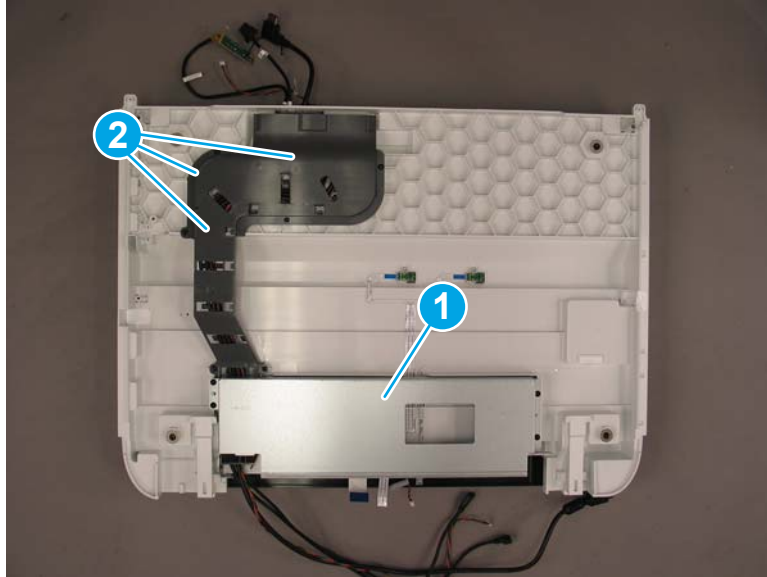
Remove the SCB shelf the cable guide cover (P774/P779)
